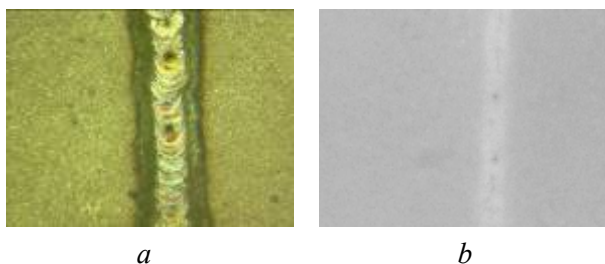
Macroscopic (a) and radiographic (b) aspect of the welded area.
